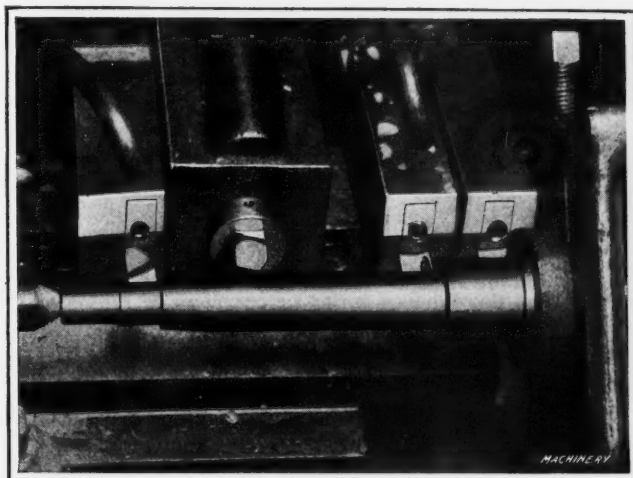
Lathe showing Tooling for turning the Bearing Surfaces of a Stem Gear
